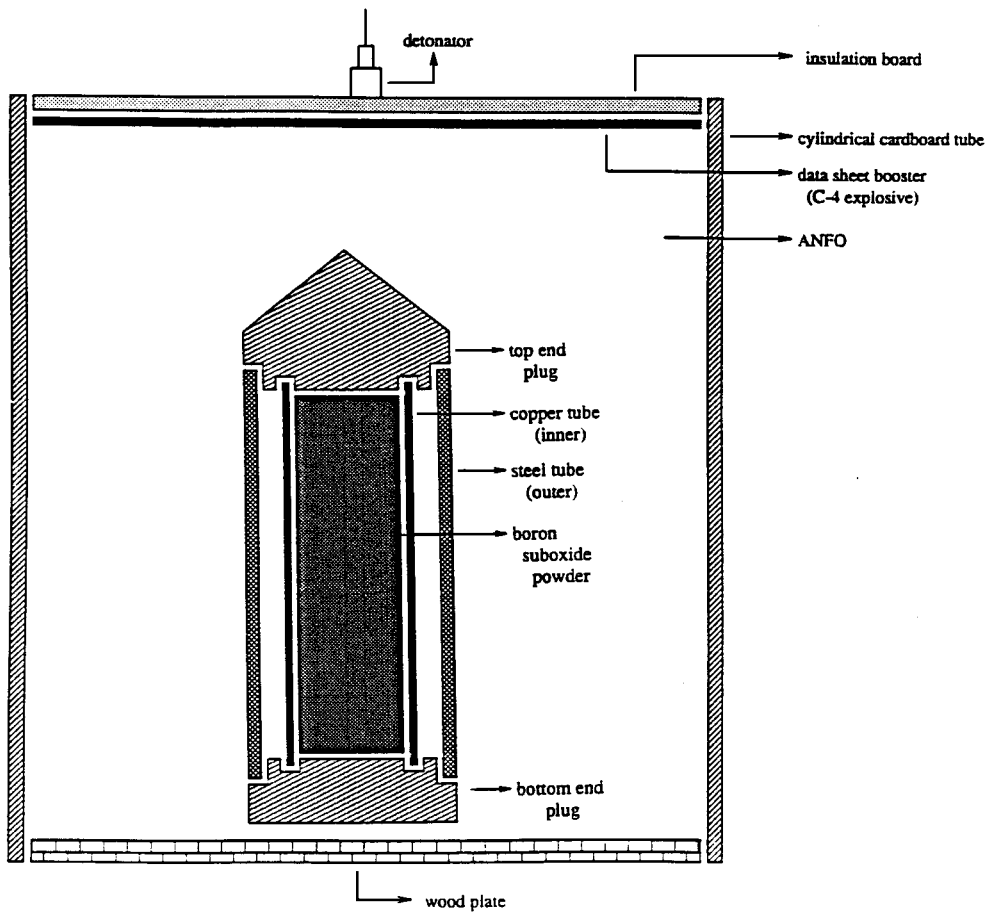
Cylindrical, axi-symmetric double tube explosive consolidation setup (P. 7).
